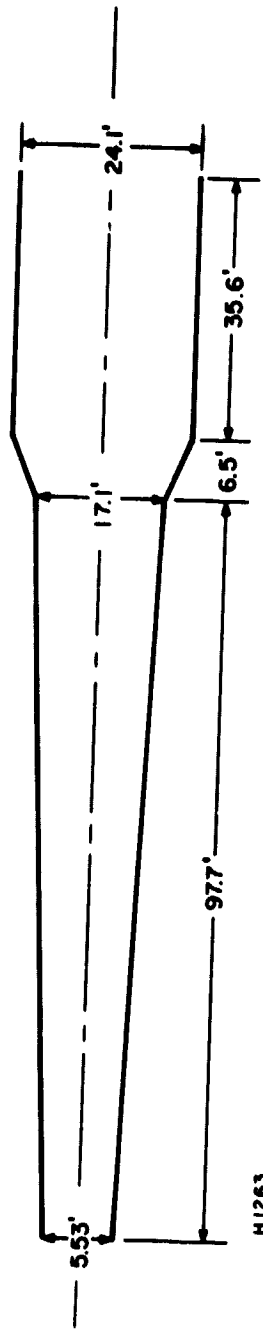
Schematic Outline Drawing of Diffuser and Transition Section for Reference Plant 1, p.p.1
